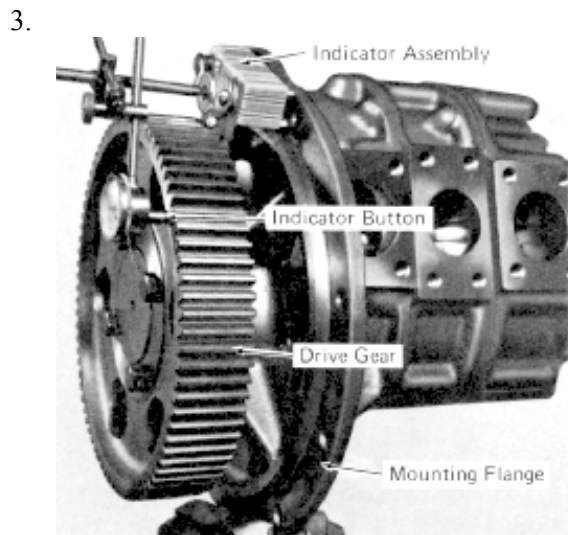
Checking Pump Drive Gear End Thrust
